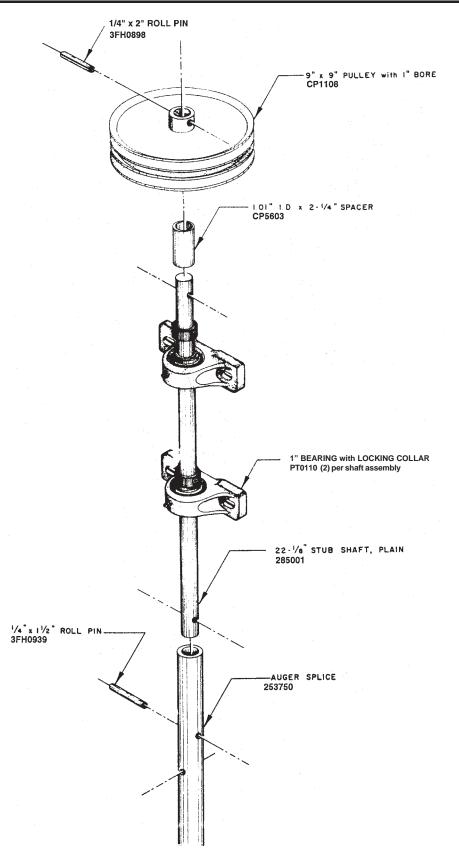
Stub Auger Assembly No. 1 (280001)
